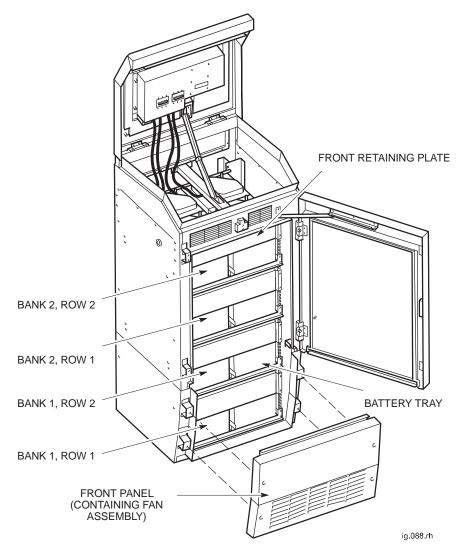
Battery arrangement in the auxiliary equipment housing
